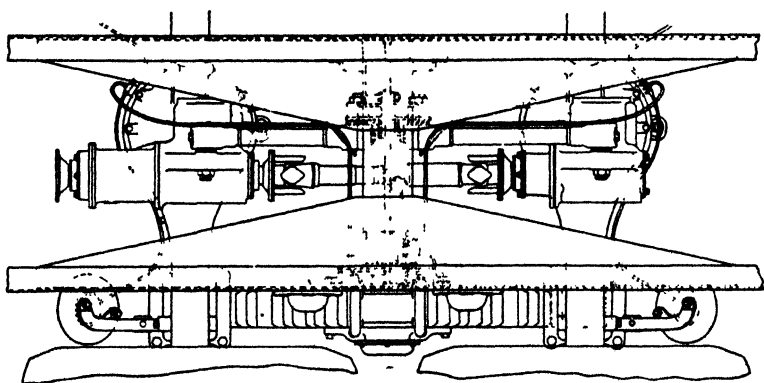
PLAN OF MACK FOUR-WHEEL BOGIE.
